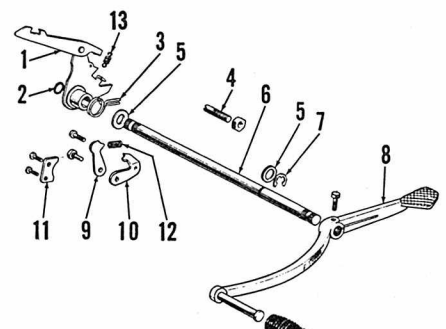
Exploded view of gear change linkage. Lever (1) engages pins (2—Fig. K2-17) and turns the shift drum.
